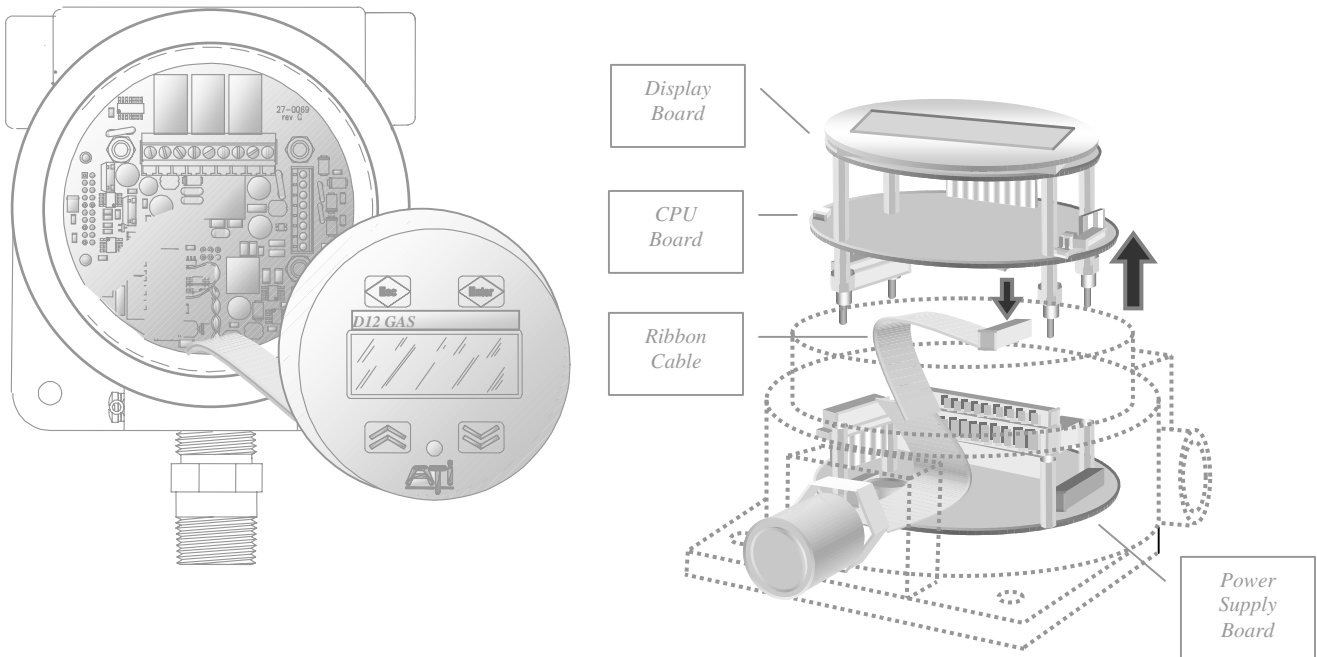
Removing Top Boards to Access Transmitter Terminals.
